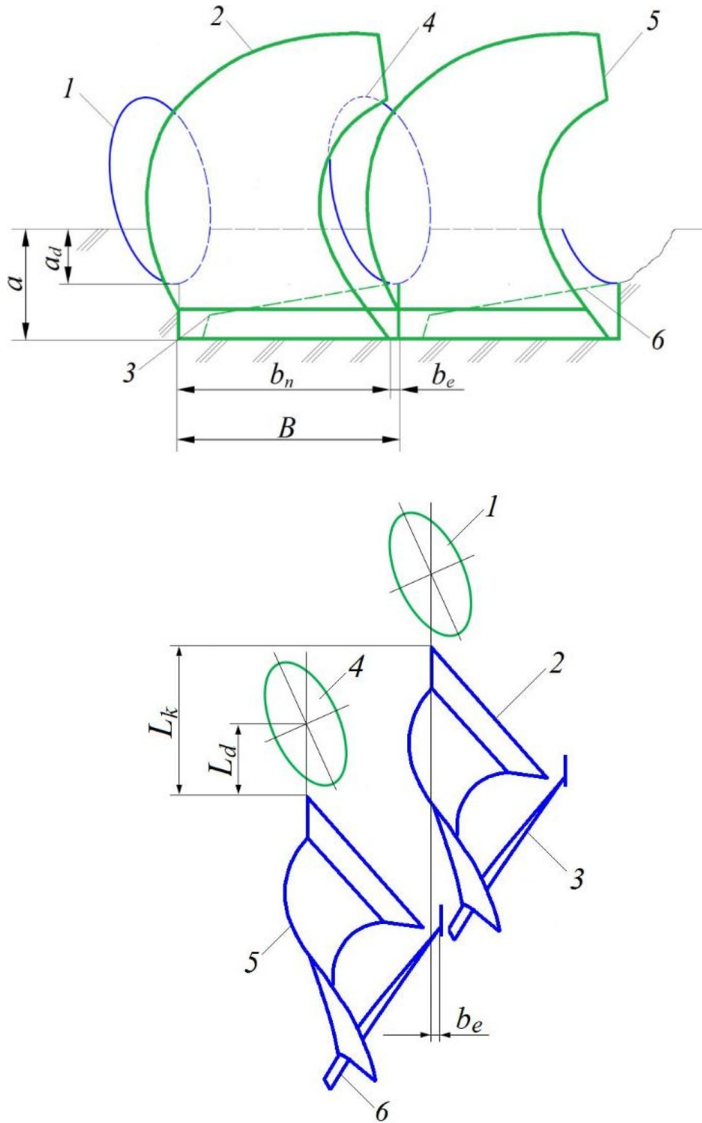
Interposition and parameters spindle plug disc-shaped angle controller and housing
